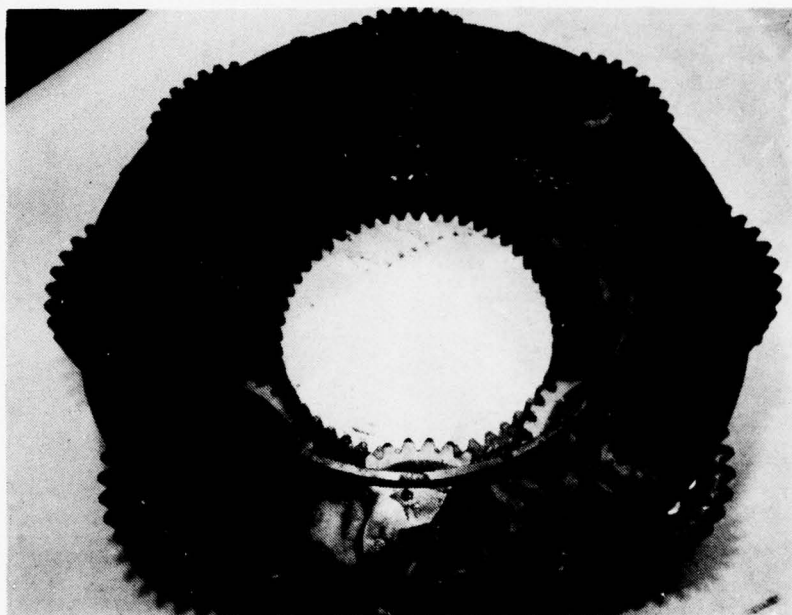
Upper planetary assembly after fourth loss-of-lube test.
